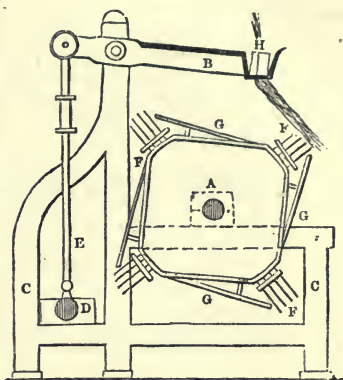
will more clearly show the construction of this machine. A, square truncated cylinder carrying the hackles; B, oscillating arm or lever for supporting the holder; C C, framing; D, crank and shaft; E, connecting rod from crank to oscillating arm; F F F, hackles; G G G, back board; H, holder. The first motion was given by pulleys on the shaft D, which revolved 4 times to 1 of the hackle cylinder, by the intervention of suitable wheels. The worm and wheels for the bell motion were attached in the usual manner to the shaft of the cylinder.
